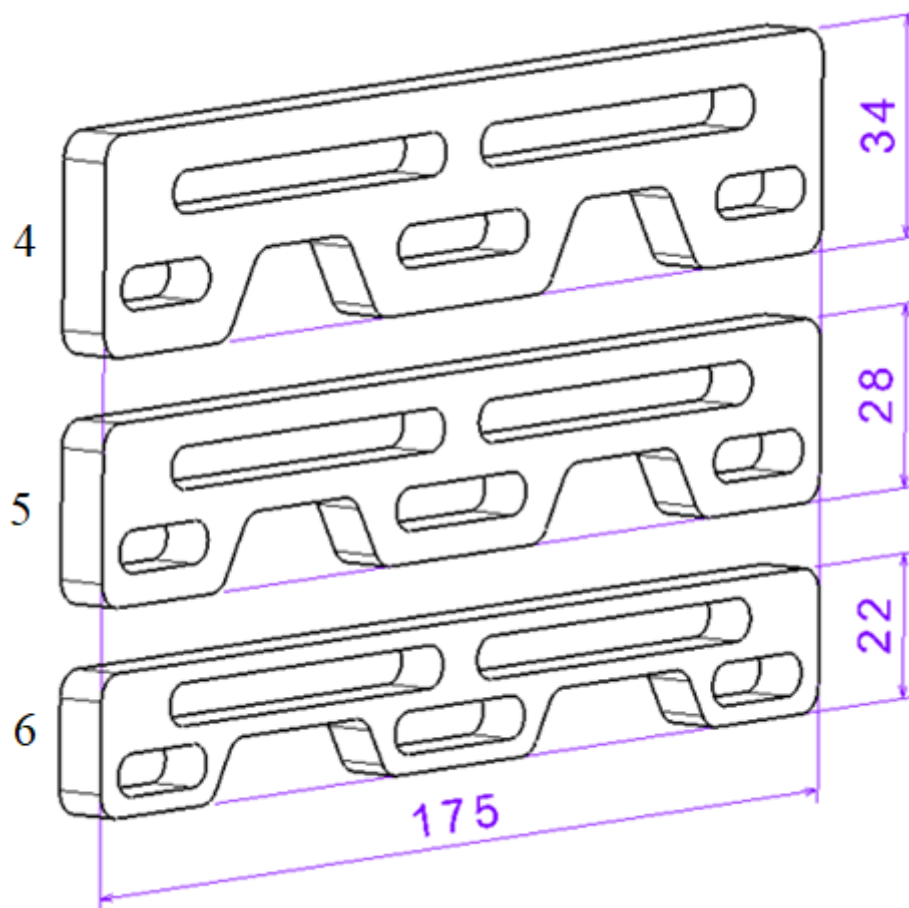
Samples of composite fixator ring with different dimensions-concept 3
